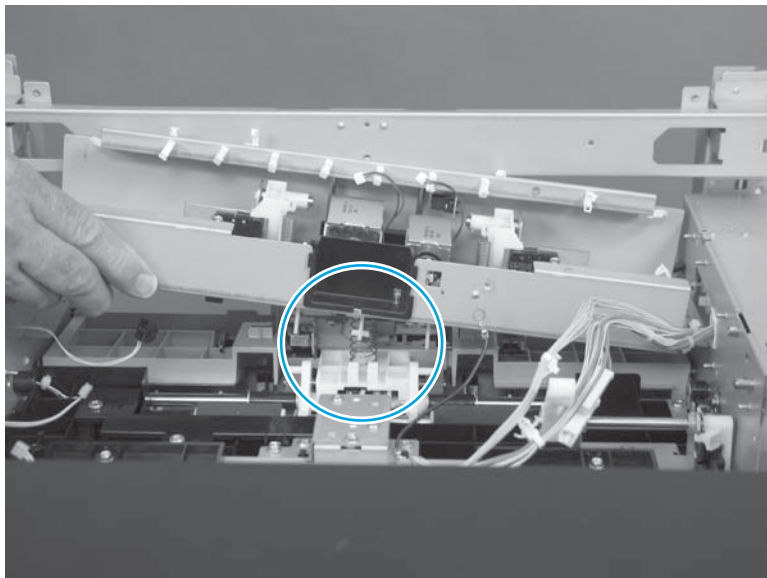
Remove the upper cross member assembly (13 of 13)
